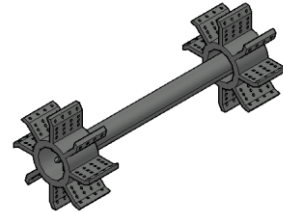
Design of paddlewheel with 16 holes 2.6 cm diameter blade
